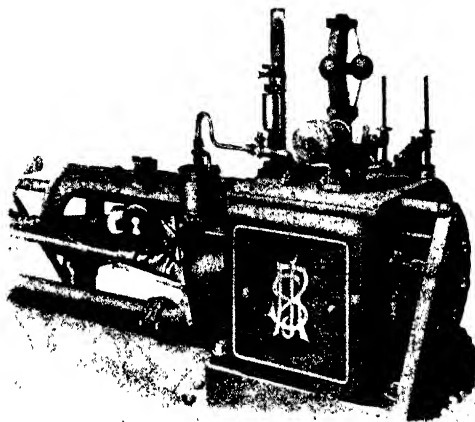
MECHANICAL OIL PUMP FITTED TO CYLINDER OF PORTABLE STEAM ENGINE (*Ransome, Sims & Jeffries, Ltd.*)
